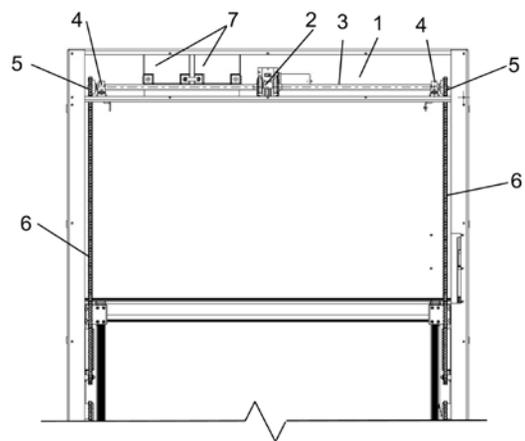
Drive of the closing/opening mechanism: 1 – top case profile; 2 – gear motor with a direct current electric drive; 3 – drive shaft; 4 – bearing support; 5 – chain sprockets; 6 – cable chains; 7 – emergency power supply batteries
